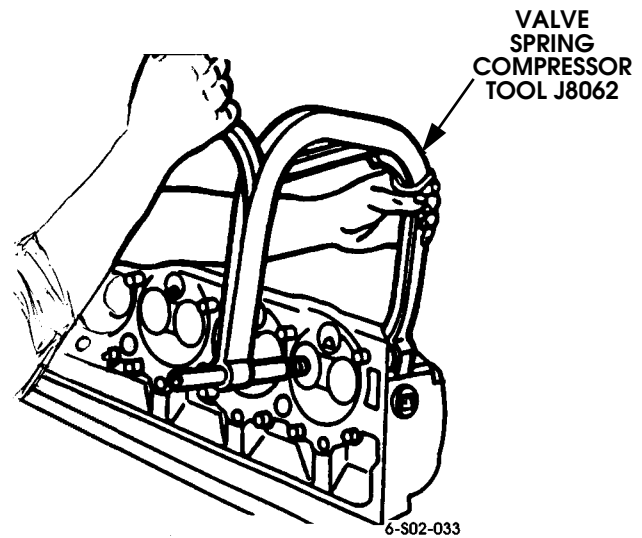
Compressing Valve Spring (to Remove Locks)
